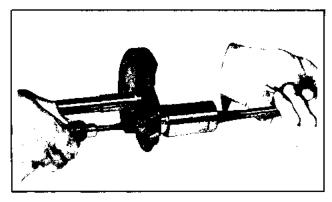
E-72. Installing Crank Pin on Circuit Breaker Side of Crank Pin (1963-1976)
